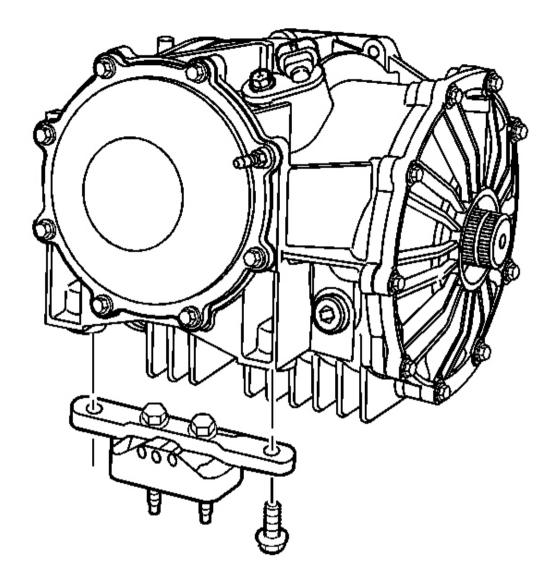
Mount Location Courtesy of GENERAL MOTORS CORP.
